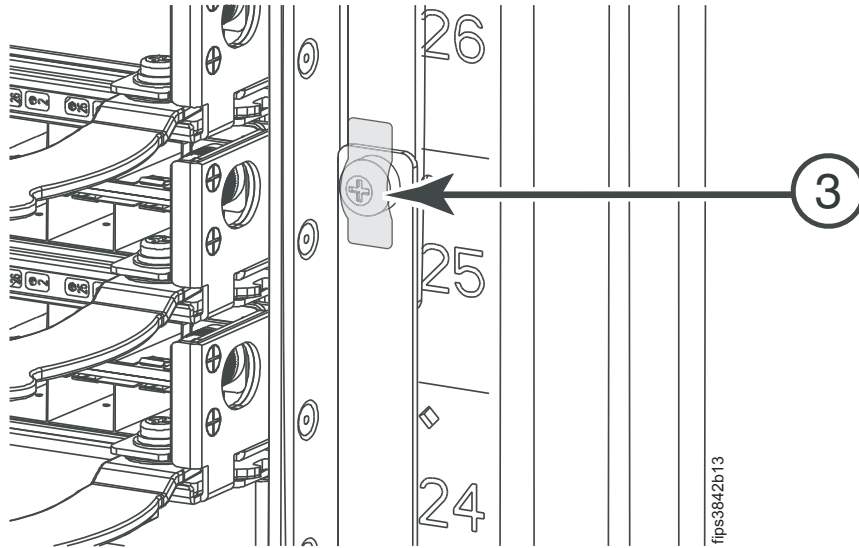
Lower right 2499-416 FIPS seal application (detailed port side view)
